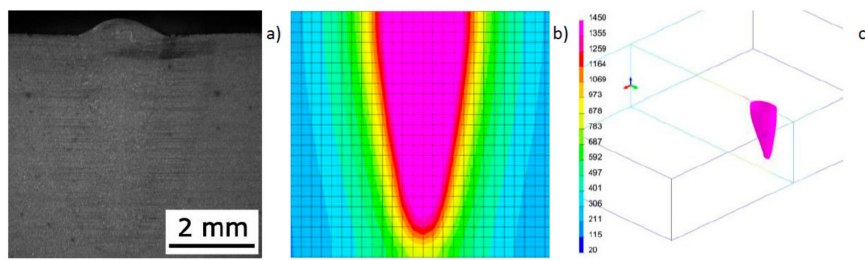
View of the macrostructure of the bead (a) in bead-on-plate welding tests performed on a 6.0-mm-thick sample of S355 steel using the Trumpf TruDisk 3302 disk laser at laser beam power of 1500 W and a welding speed of 8.3 mm/s; (b) cross-sectional view of the molten pool obtained as a result of numerical simulation; and (c) the 1450 °C iso-surface.
